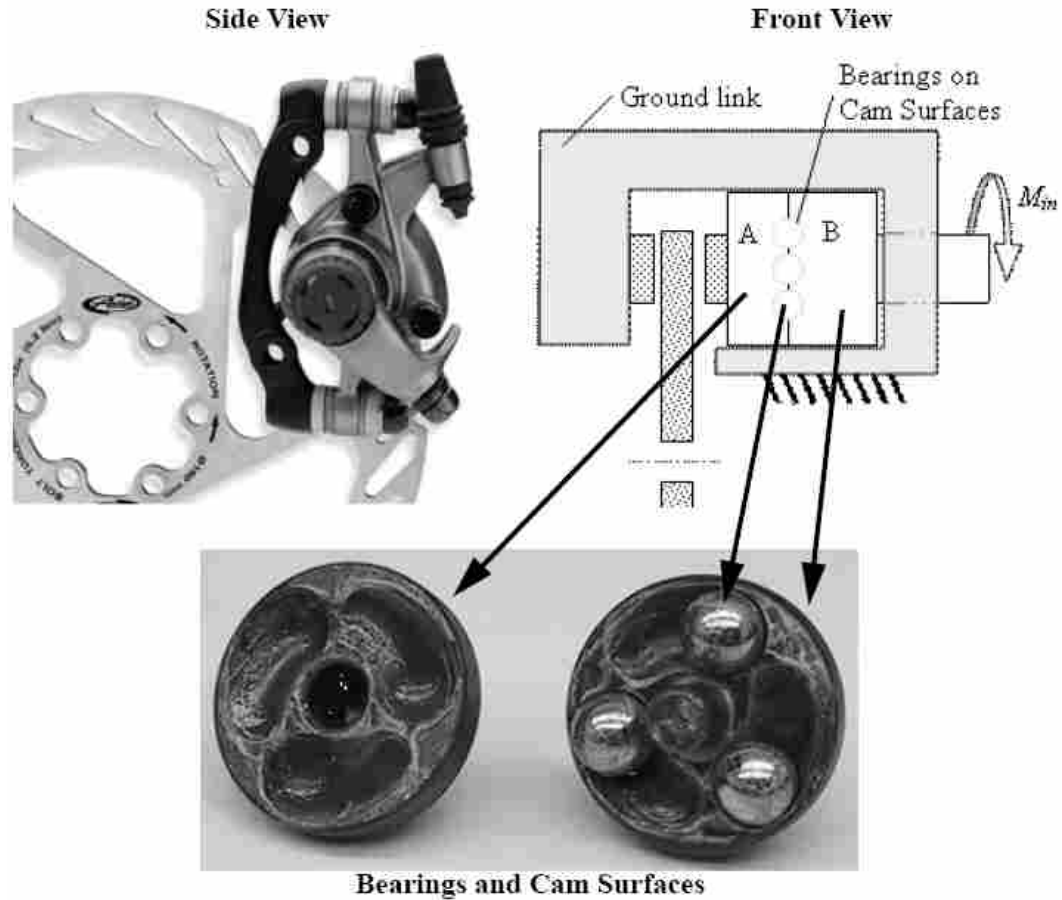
Avid bicycle mechanical disc brake (side view). Front view shows the internal wedge mechanism (cams and sliders A and B) used to actuate a single pad into contact with the rotor [6].
